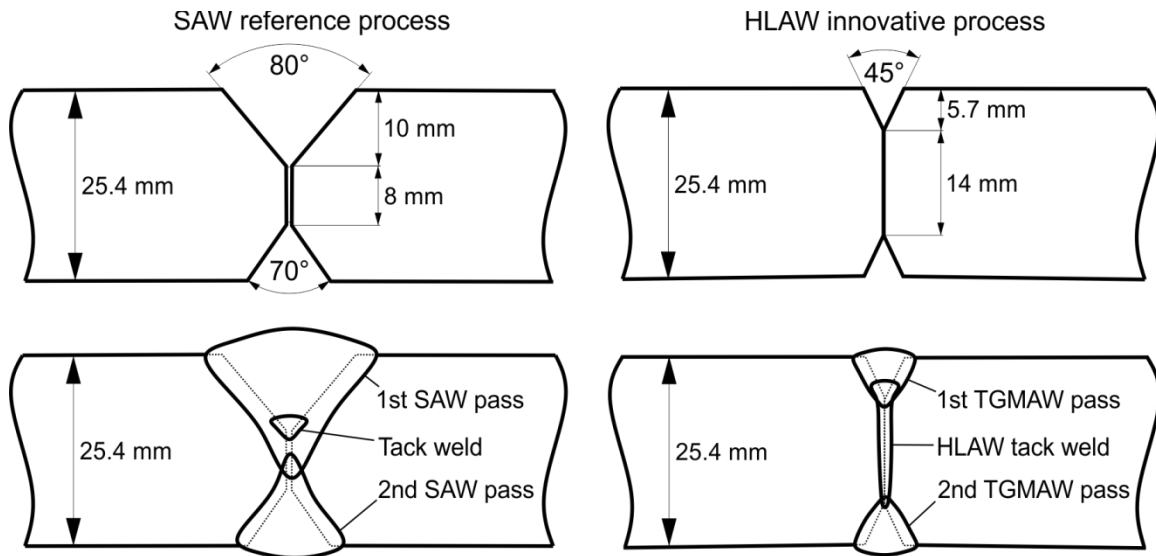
Seam preparation and welding sequence of process A_w (SAW) and process B_w (HLAW). In B_w , significant savings in welding material and electricity consumption are achieved.
